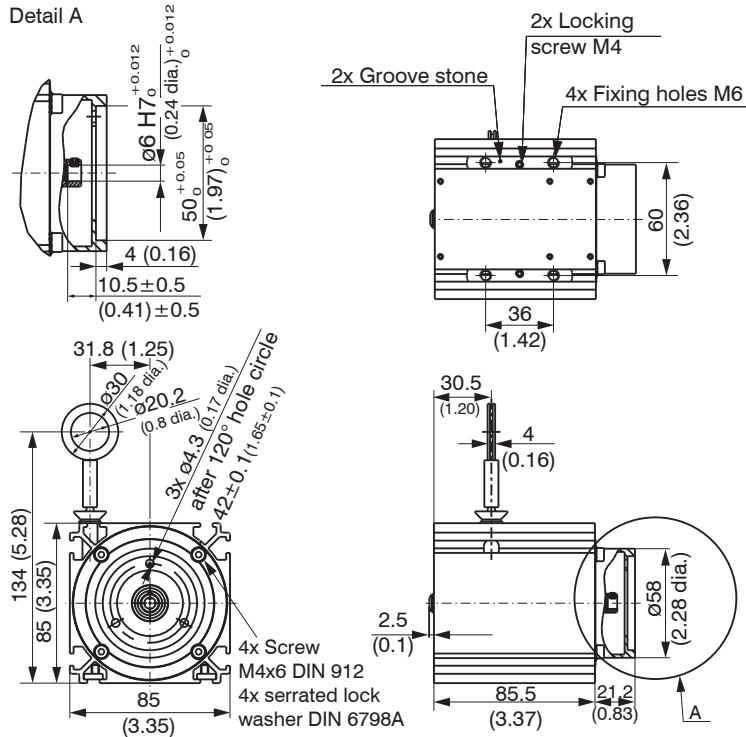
Dimensional drawing sensor series P85, dimensions in mm (inches), not to scale
